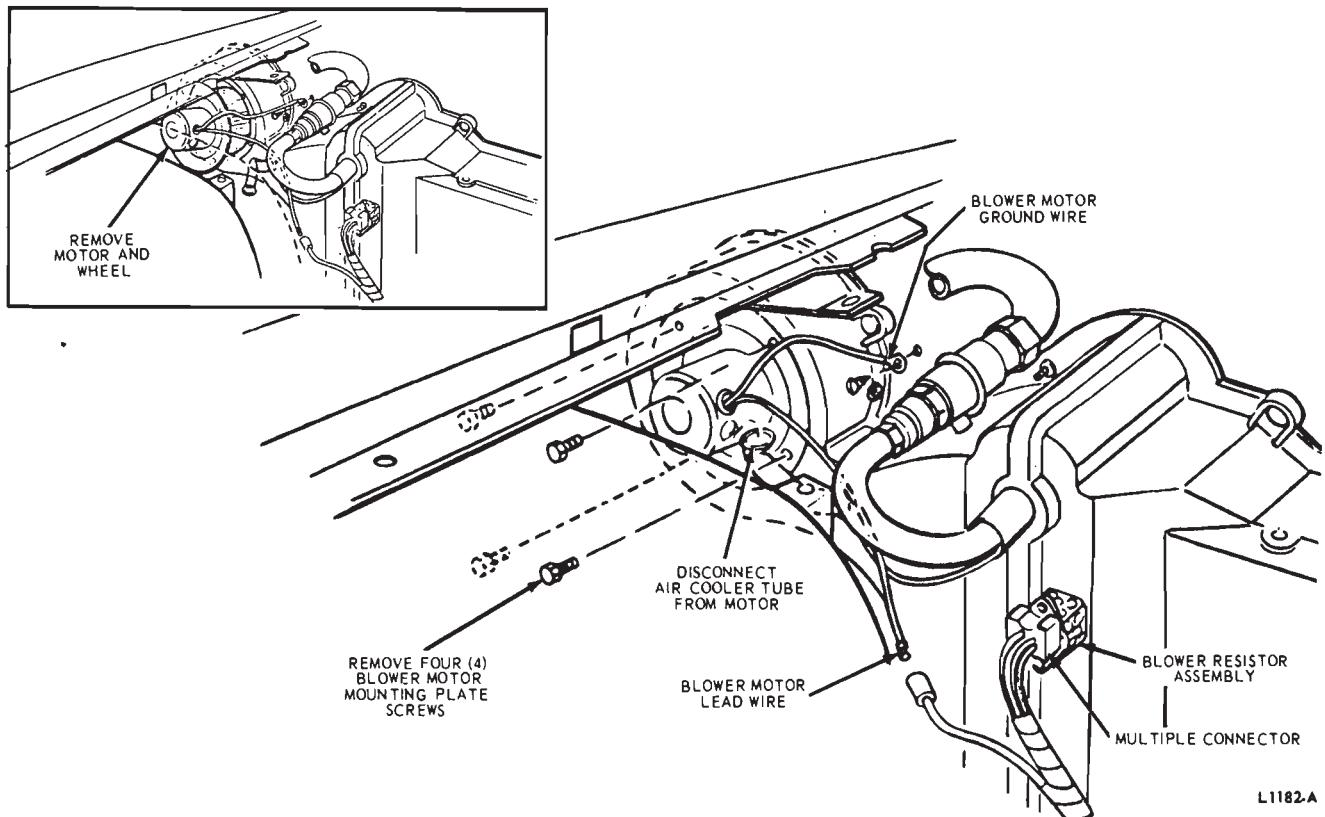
Manual A/C-Heater System Blower Motor Removal—Lincoln Continental
